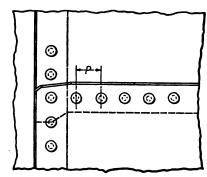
LAP JOINT, LONGITUDINAL OR CIRCUMFERENTIAL, SINGLE-RIVETED.
